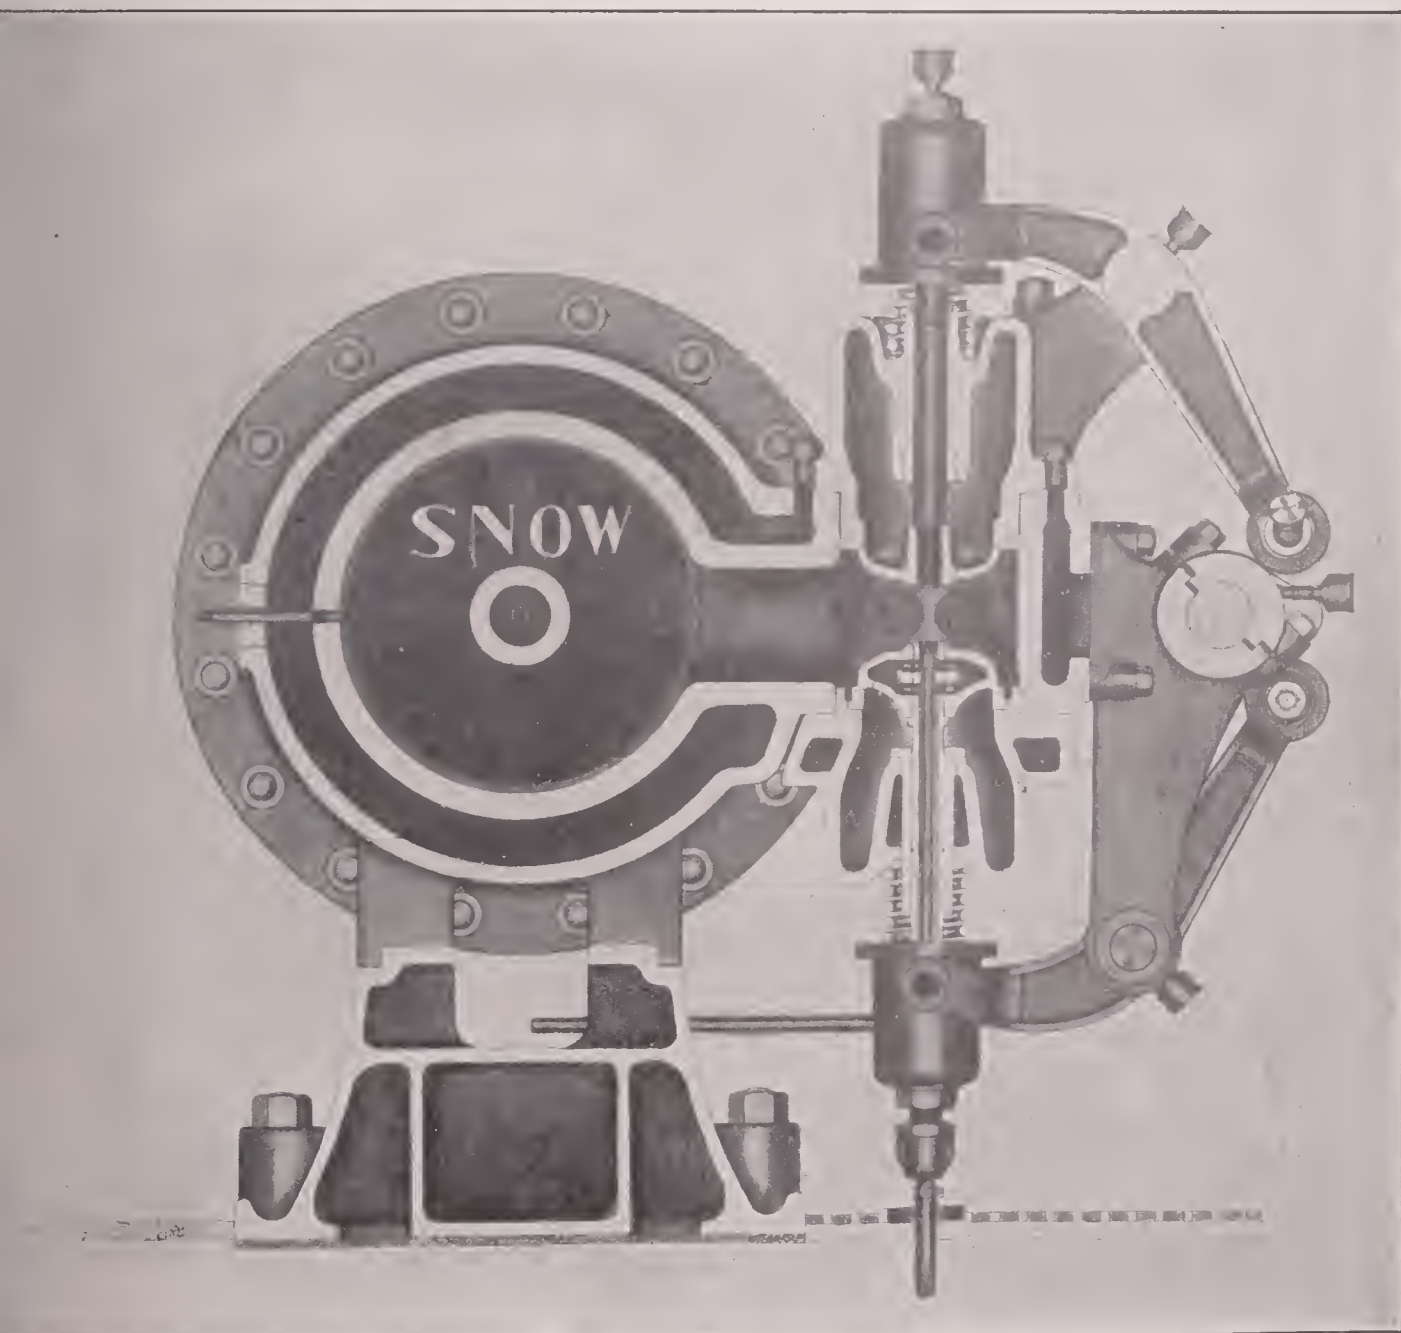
Valve Gear, Type B Snow Engines. 200 to 1000 H.P.
